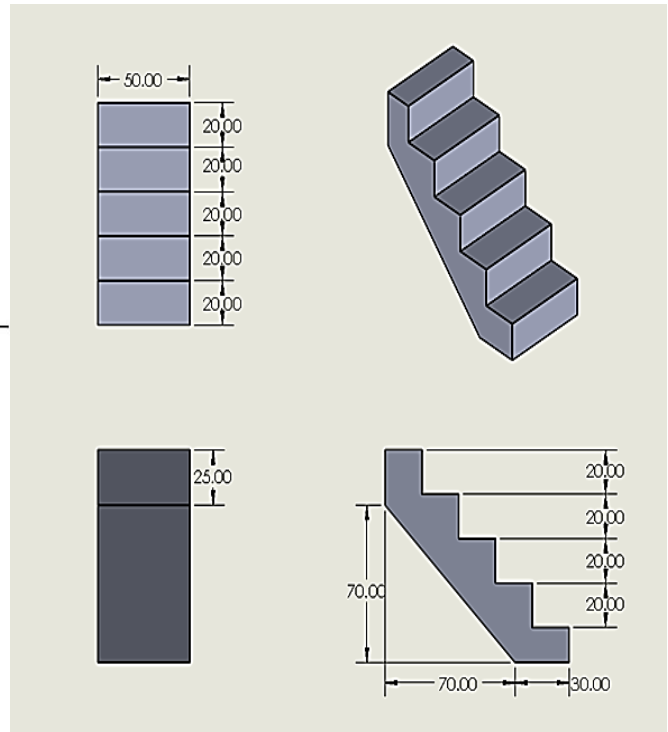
Test sample 2 (staircase) designs and Dimensions
